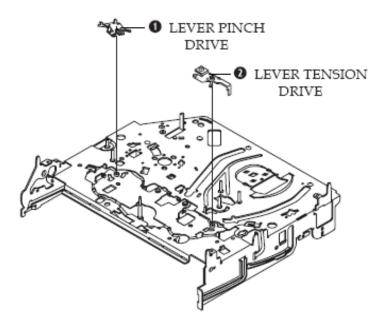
Lever Pinch Drive, Lever Tension Drive Removal
